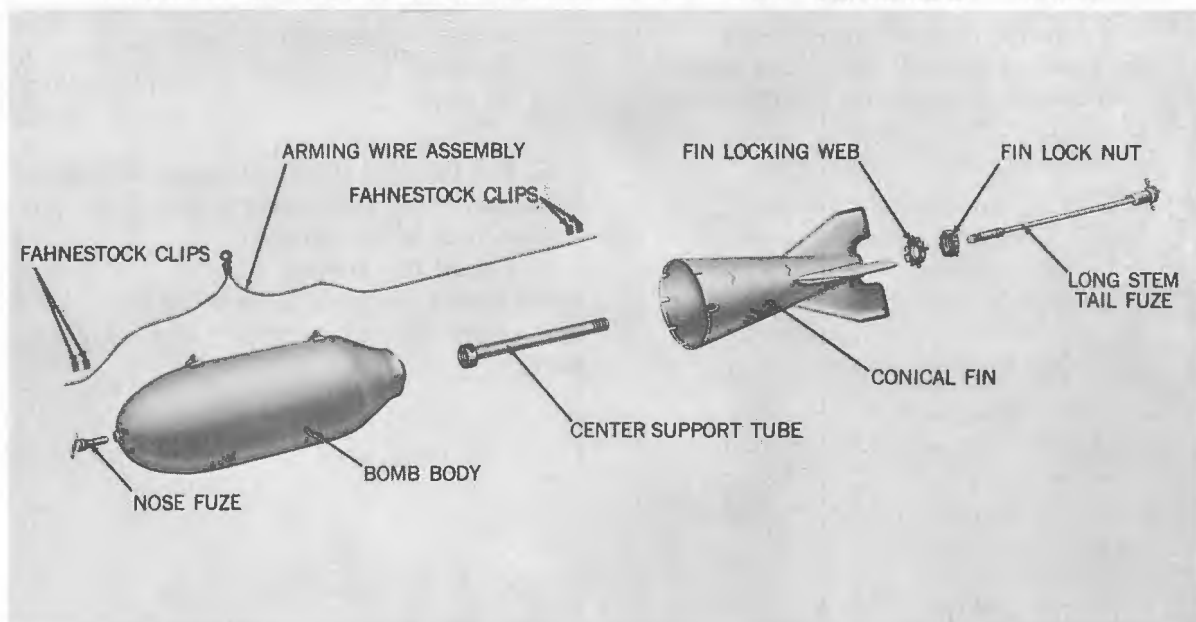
2000-lb GP Bomb AN-M66A2 with Fin Assembly M130, Exploded View.
